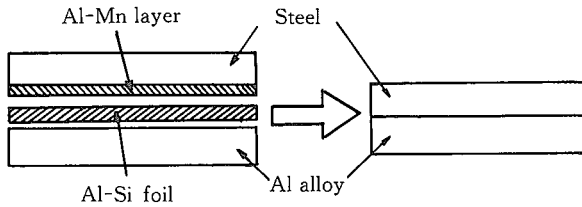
Schematic illustration of aluminium and Al-Mn plated steel sheet with insert of Al-Si foil
